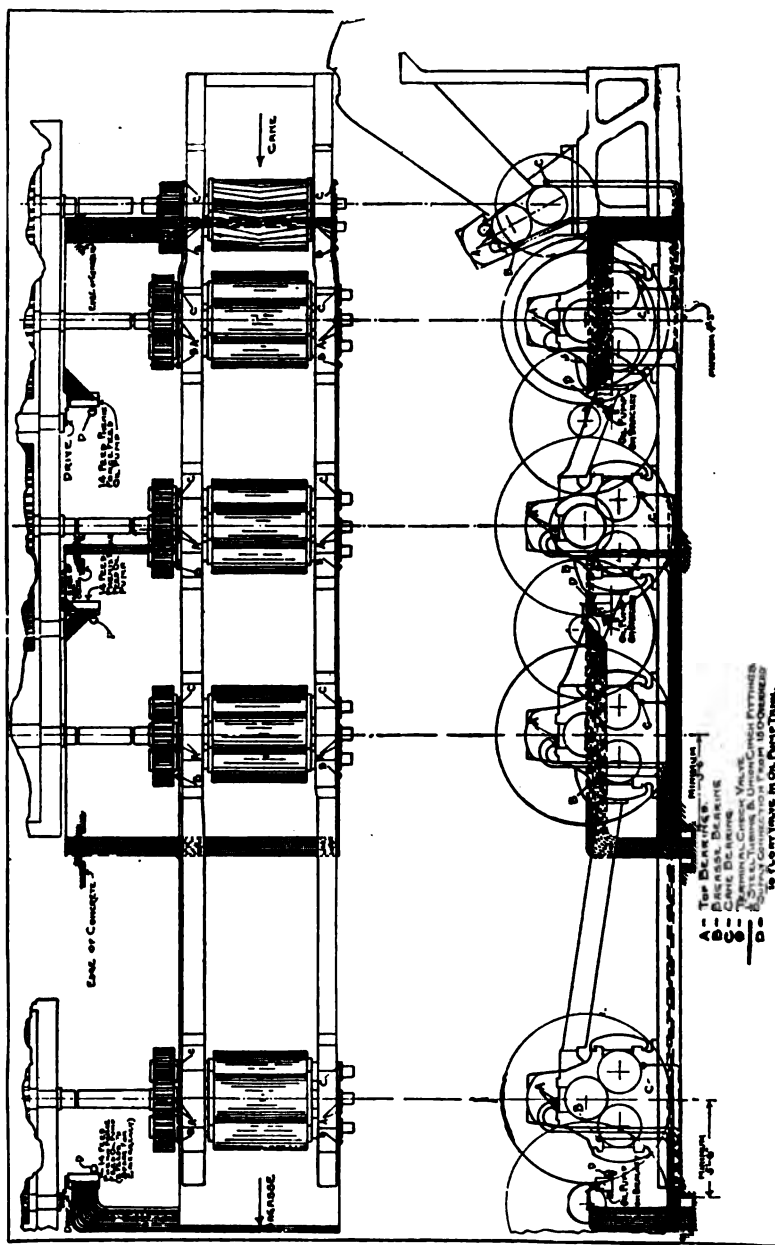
Sec. 100g.—Forced feed oiling system for sugar mill machinery.
